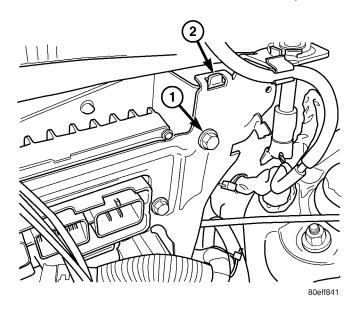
PCM MOUNTING Screw AND LOCATION TAB
